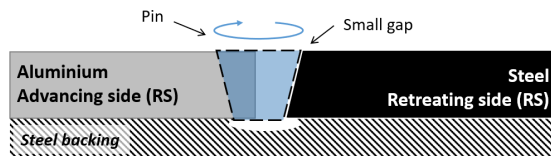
Schematic illustration of the pin and its location in the weld groove during production of the first HYB Al-Fe butt weld. Copied from [13].
